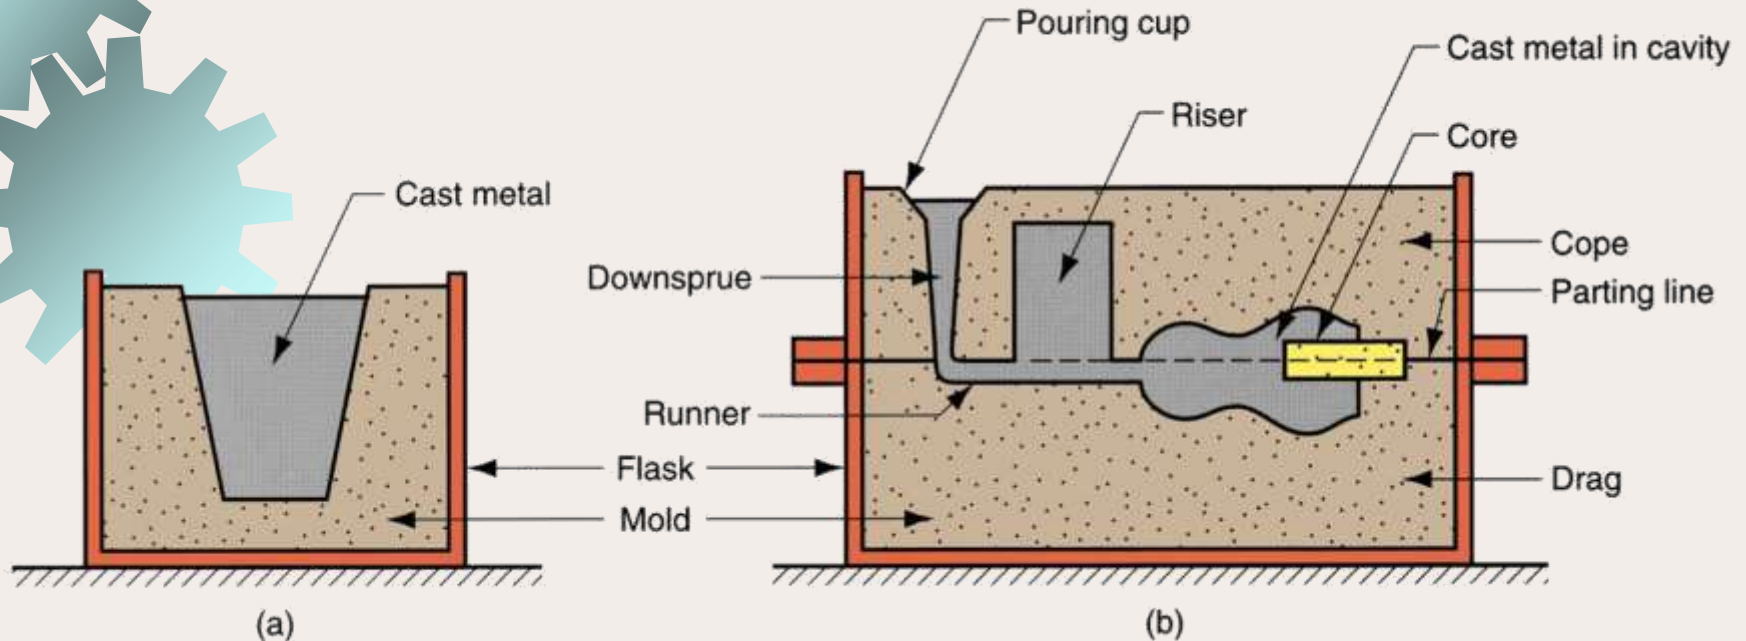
Two forms of mold: (a) open mold, simply a container in the shape of the desired part; and (b) closed mold, in which the mold geometry is more complex and requires a gating system (passageway) leading into the cavity.
